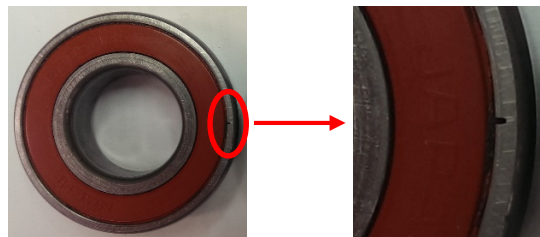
Nachi 6205-2NSE9 test bearing showing seeded outer race fault
